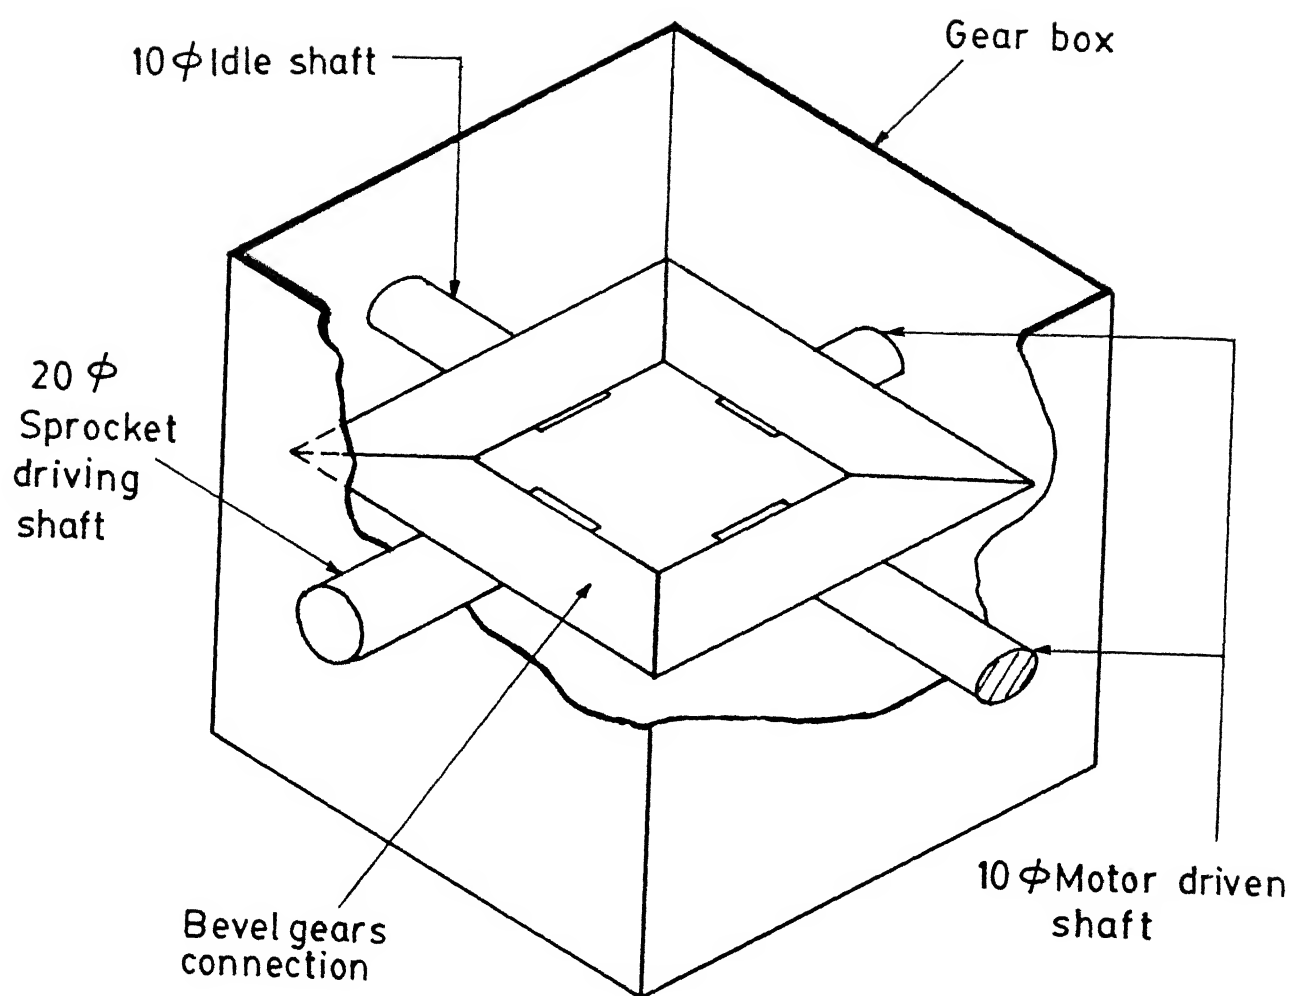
SCHEMATIC VIEW OF GEARING SYSTEM
